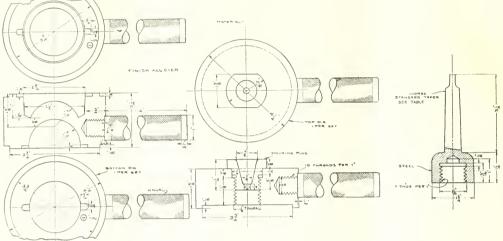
DETAILS OF MOULD AND HOLDER FOR SOFT METAL GRINDERS.
